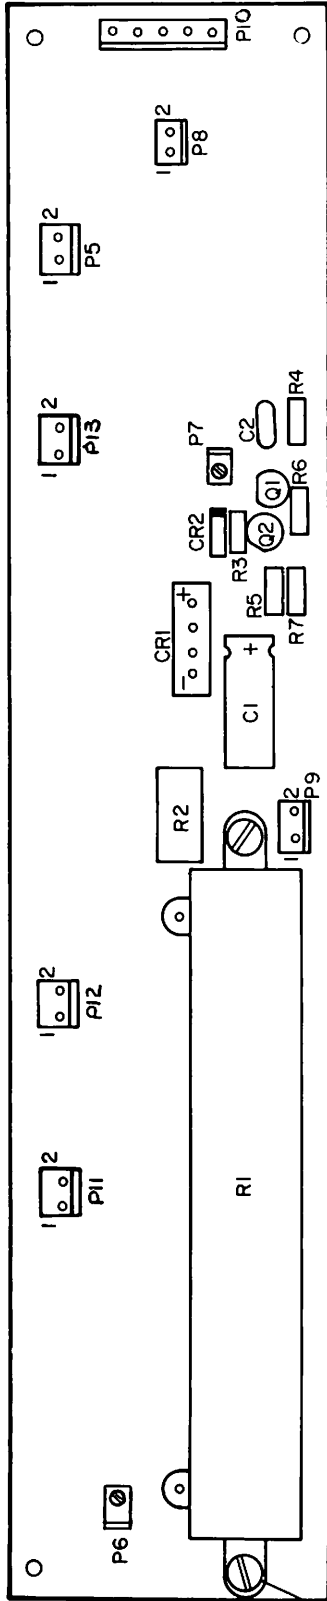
Battery/Pak Charger PCB Board Assembly
